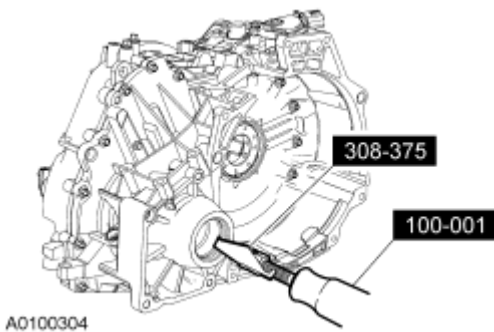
Removing RH Differential Seal Using Special Tools (2 Of 2)
